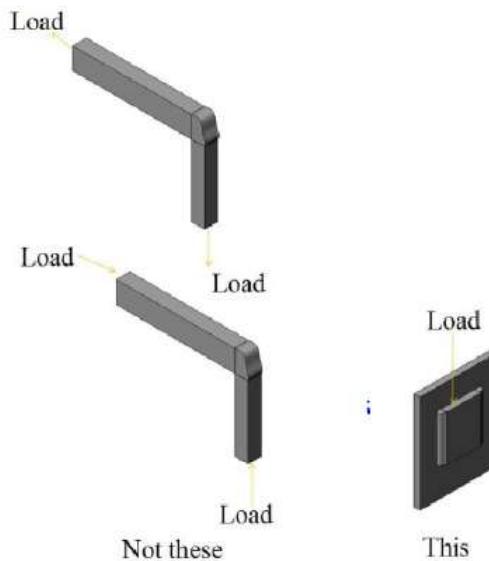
Fillet welds should be designed to be in shear only
